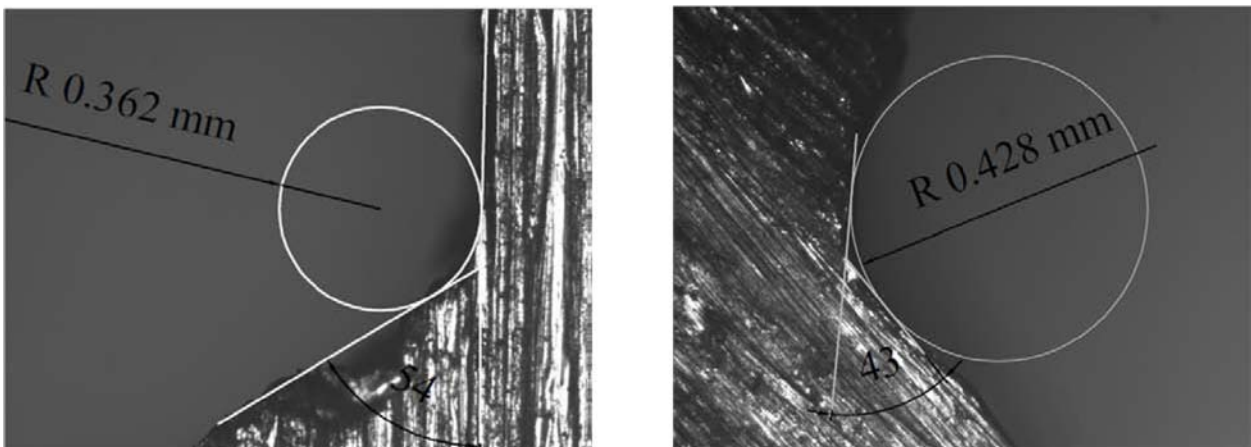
Measuring weld toe angle and radius for as-welded (left) and peened (right) specimen
